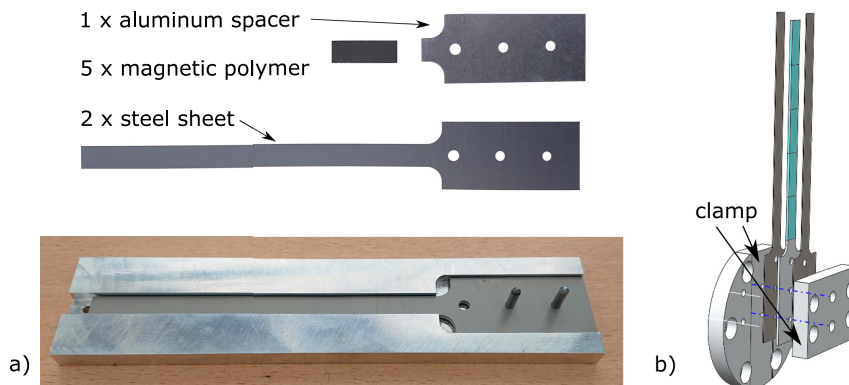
Different components of the magnetic sandwich beam separately (top view) and assembled in the sample holder (a) and schematic view of the clamping (exploded view) (b).
